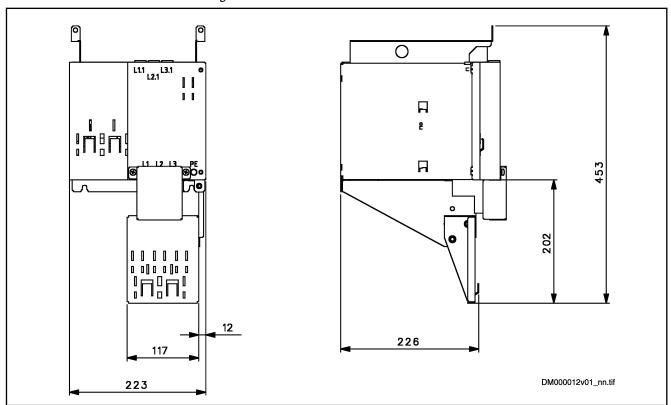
Mains filter dimensions HNK01.1A-A075-E0080/0106 with HAS02
